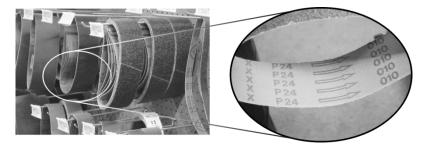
Sanding belts. (Courtesy of House of Tools)
